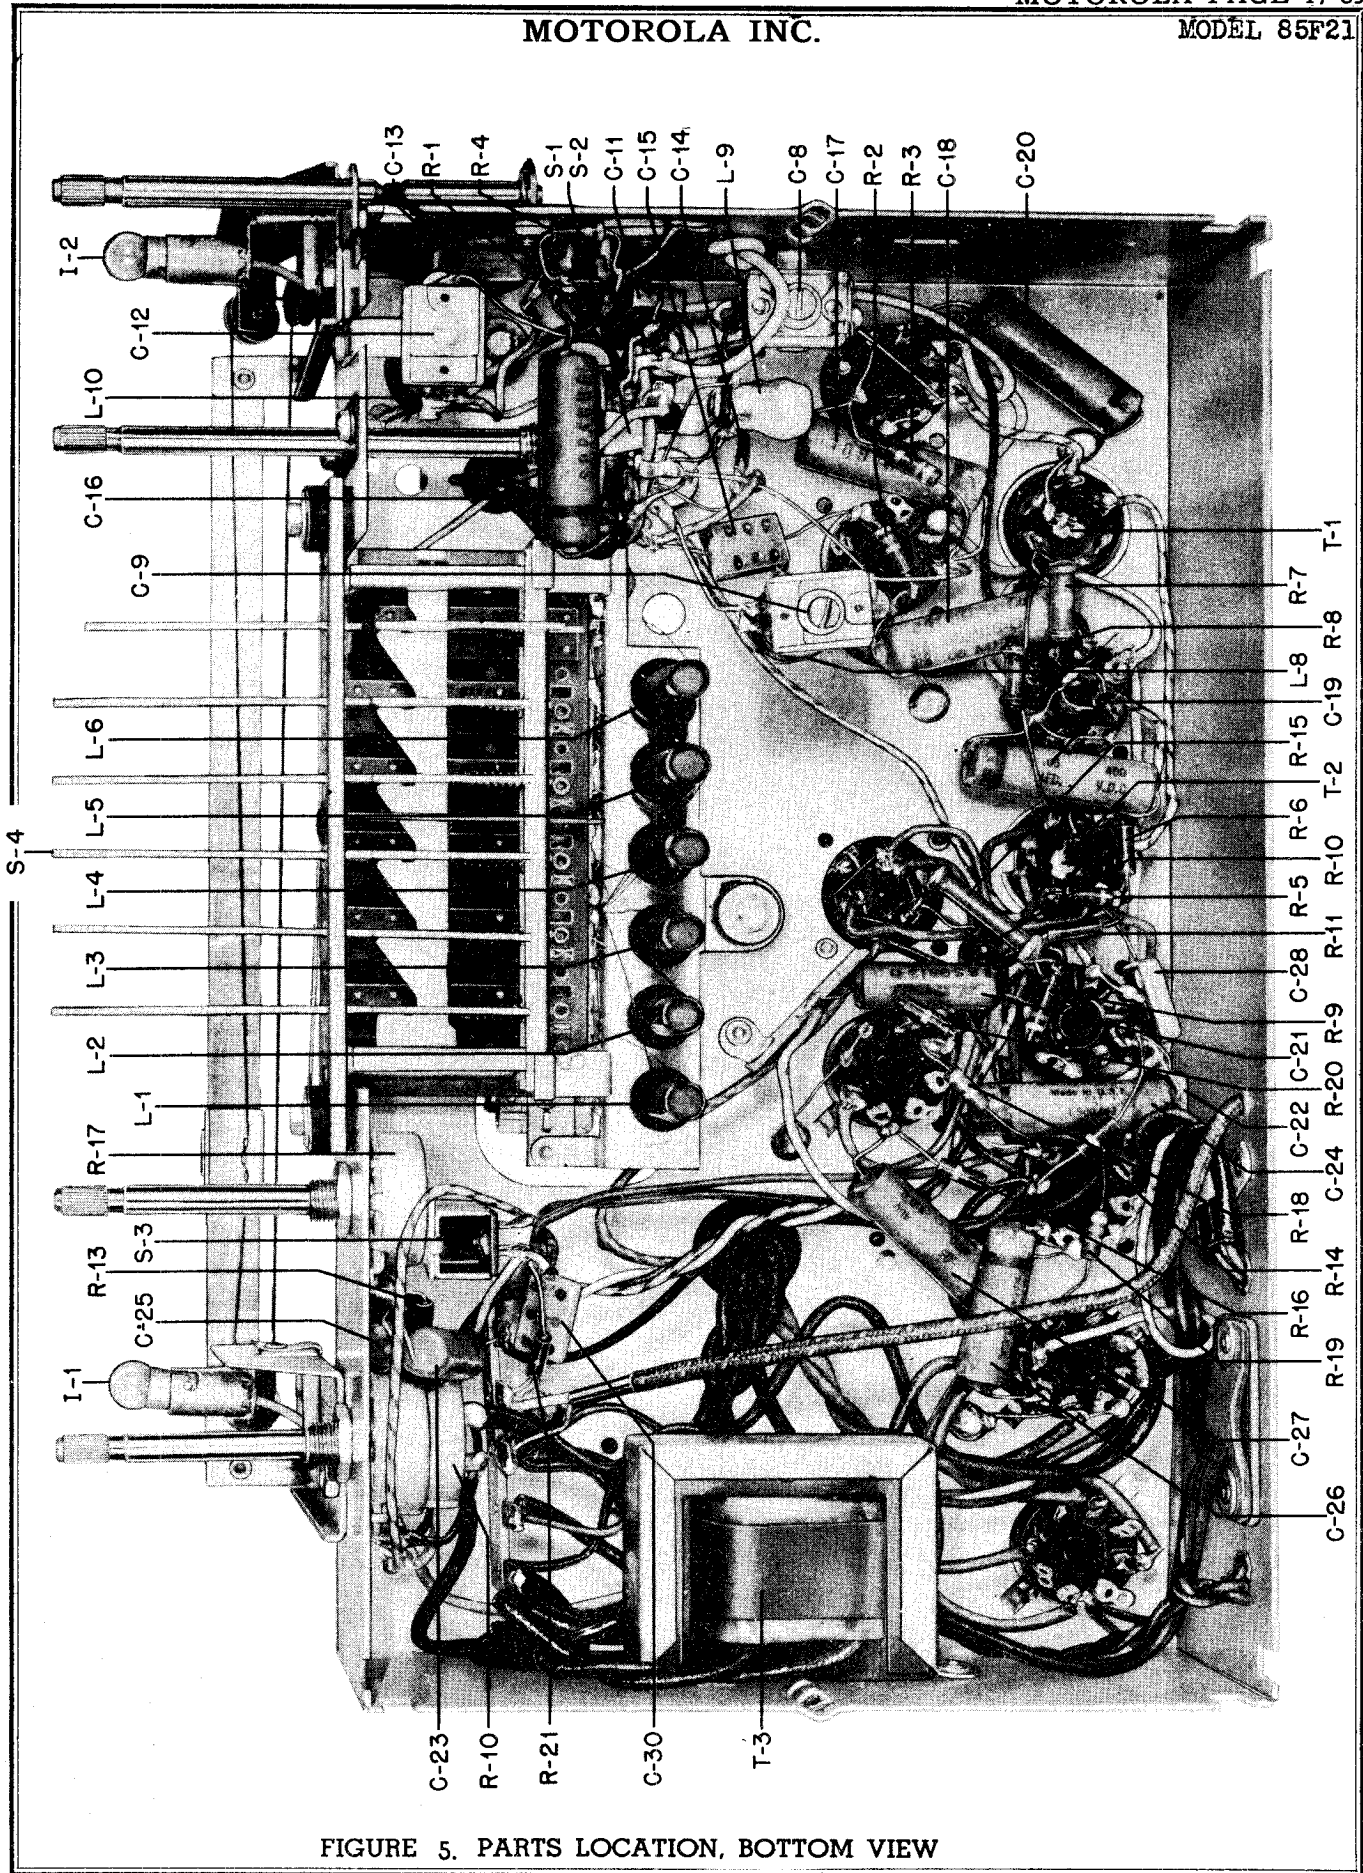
PARTS LOCATION, BOTTOM VIEW
